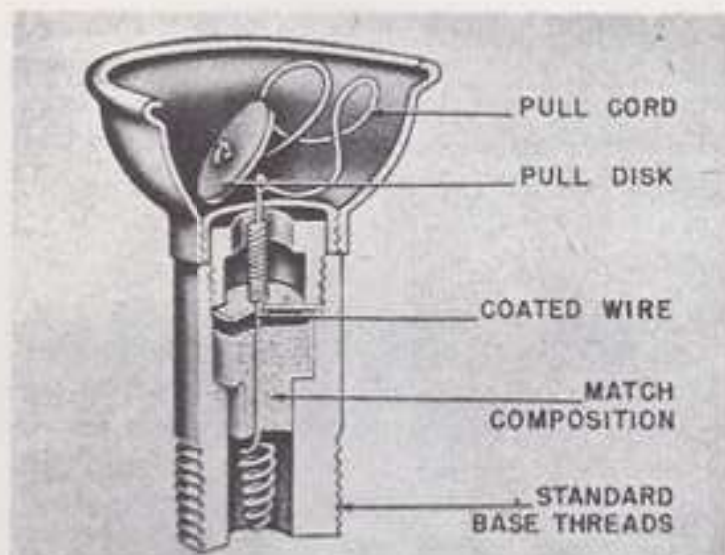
ZDSCHN-ANZ-39 Friction Igniter Pull Type
